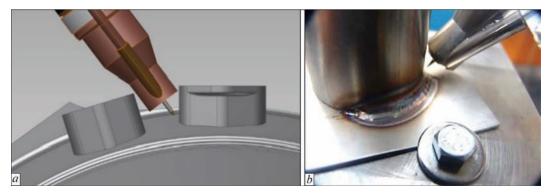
Scheme of TOPTIG welding torch arrangement between welded-on couplings (*a*) and fragment of weld of model element made by TOPTIG torch (*b*)
